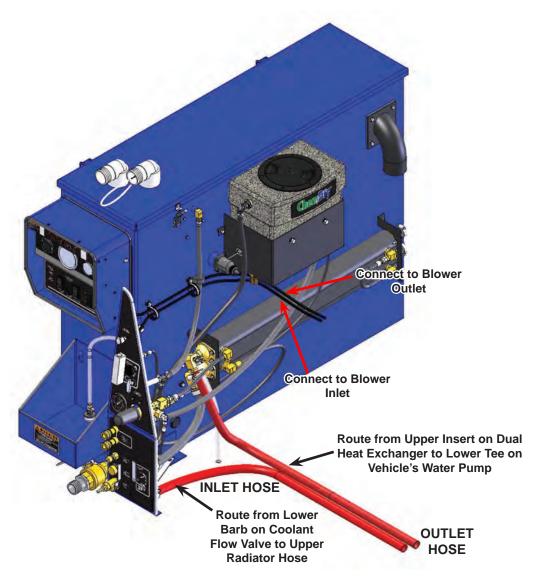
Proper Routing of Coolant Hoses to/from Engine and Blower
